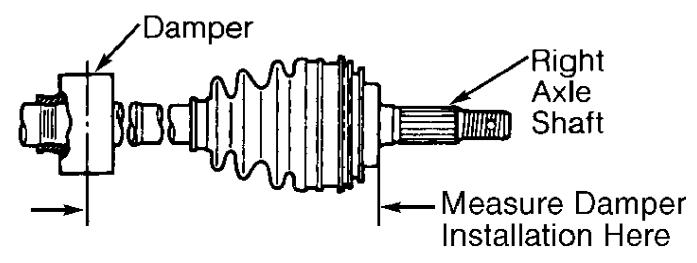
Measuring Axle Shaft Length (1.8L 7A-FE) Courtesy of Toyota Motor Sales, U.S.A., Inc.
